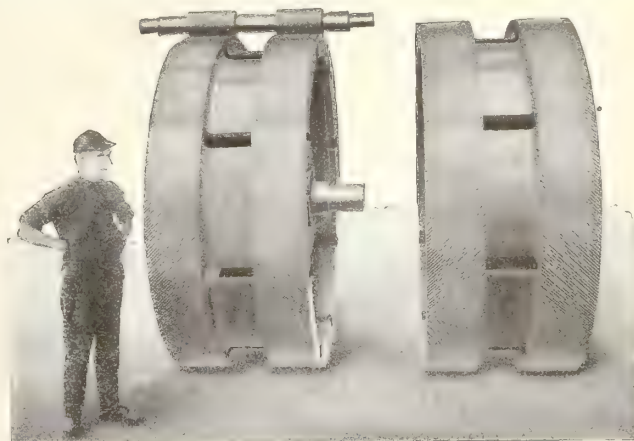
TYPICAL STEAM TURBINE GEARS.
